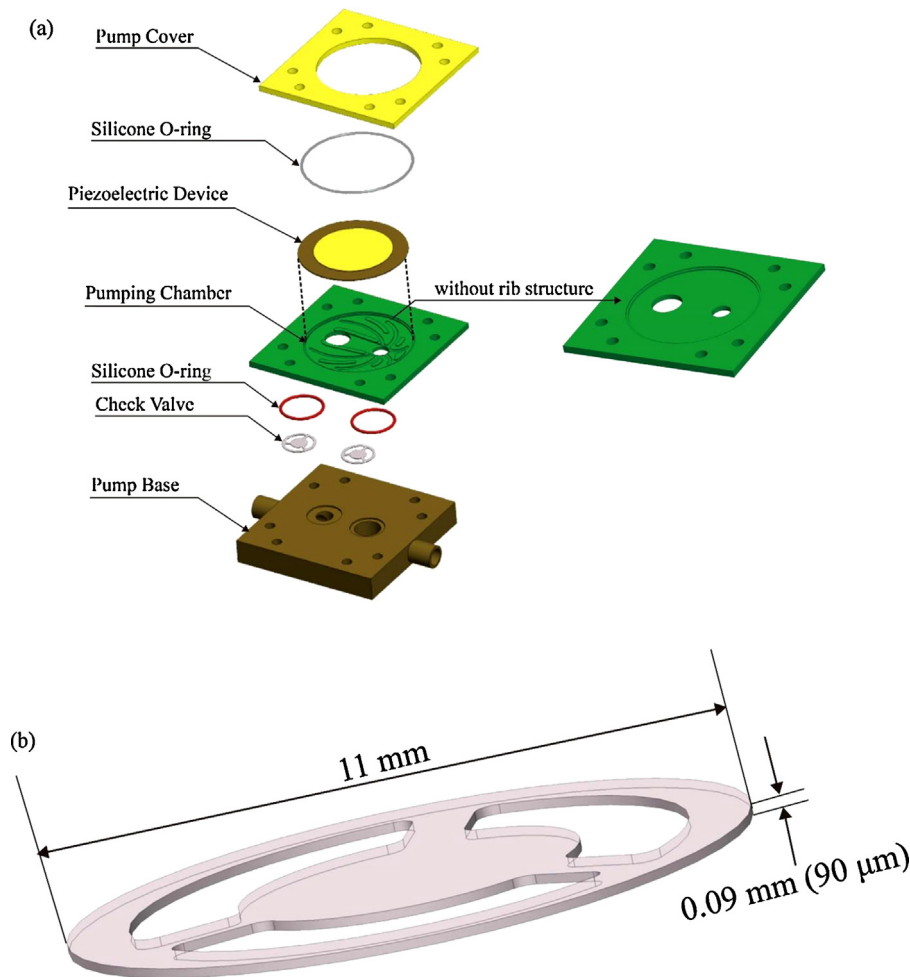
Structure of (a) the miniature pump assembly (b) the check valve.
